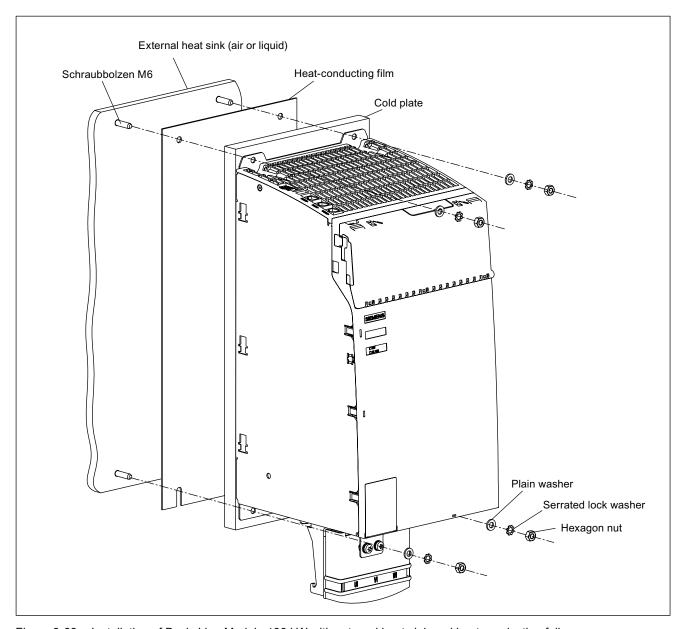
Installation of Basic Line Module 100 kW with external heat sink and heat-conducting foil
